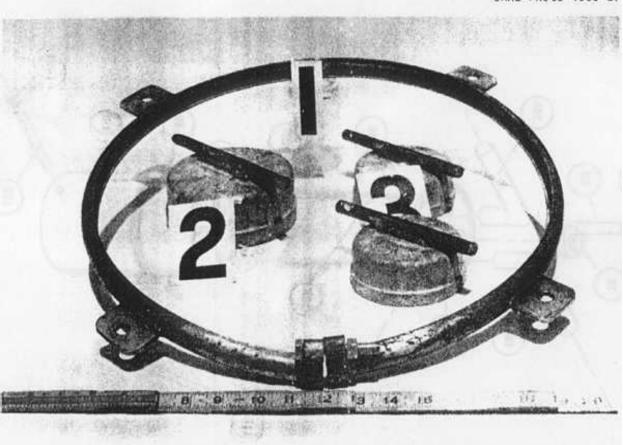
Lock ring and welded tabs. Also pictured inside the lock ring (#1): the ash cleanout cover cap (#2), and the ignition cover cap (#3).
